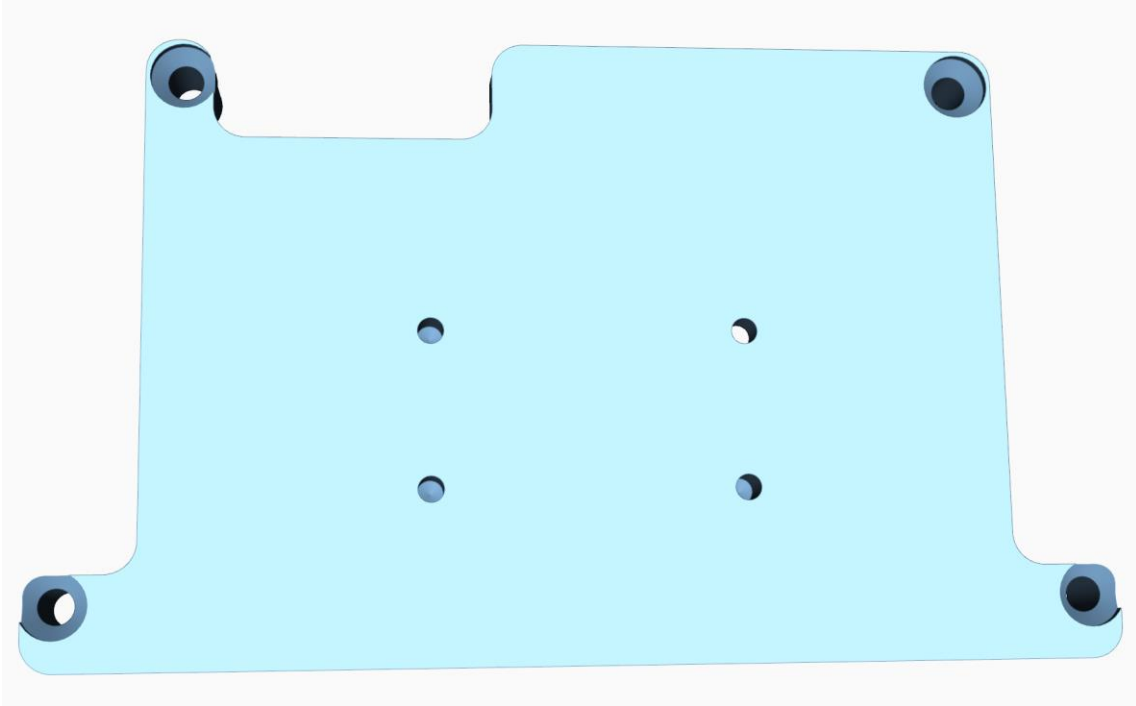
Heat Spreader 94-800913-3 Top Side View (faces away from SOM)
